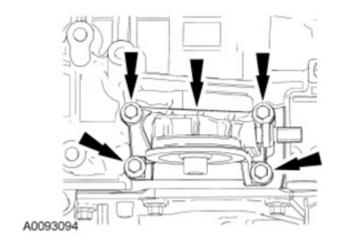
Locating Bolts And Crankcase Vent Oil Separator Courtesy of FORD MOTOR CO.
